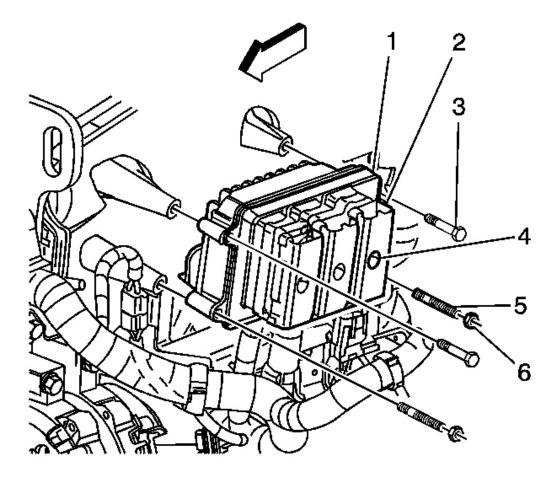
View Of PCM Assembly Courtesy of GENERAL MOTORS CORP.
